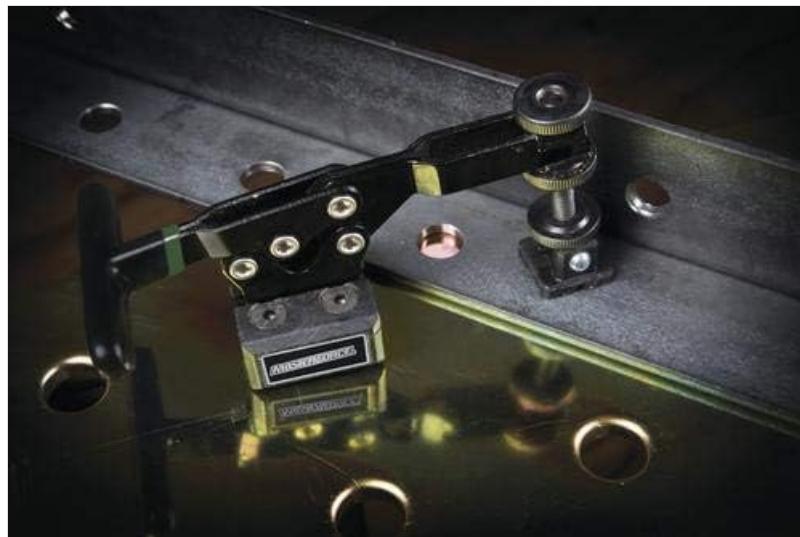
Example of a clamp securely fastened into one of the 3/4" peg holes on the Masterforce welding table, demonstrating work holding capability.
